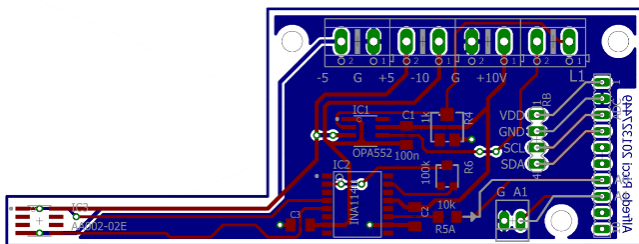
Design of paths, dimensions, and components of the printed circuit.
